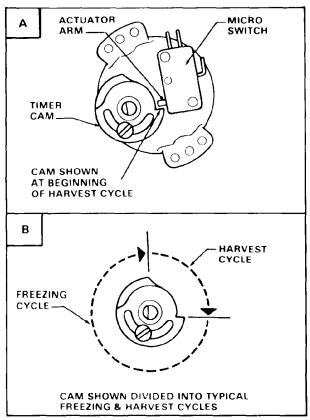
Adjustment of the Timer & Switch Assembly.
